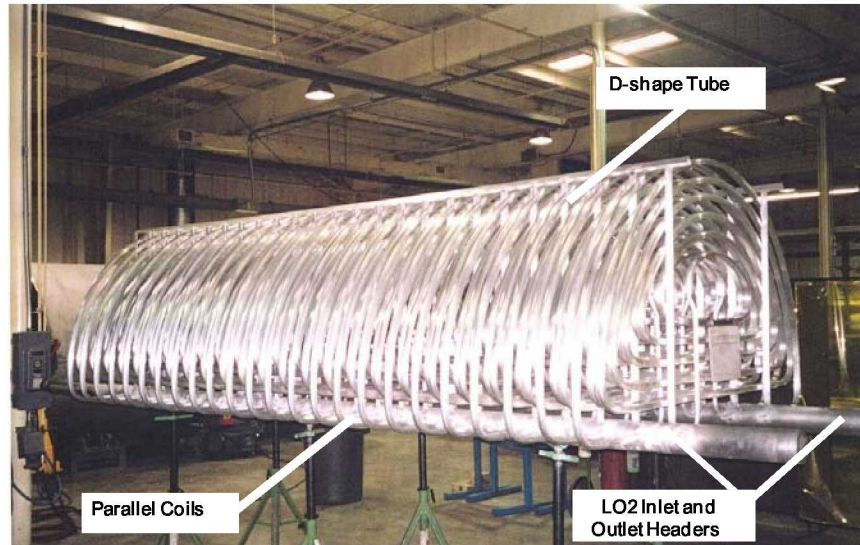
LO2 heat exchanger pancake coil D-shaped tube bundle assembly.
